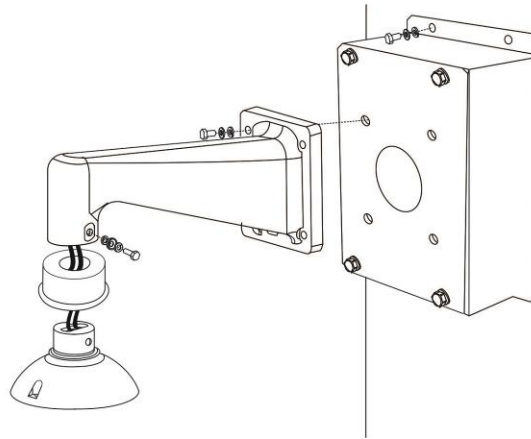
Wall Box Mounting: Wall Box Mount + Standard Wall Mount + Mount Kit
